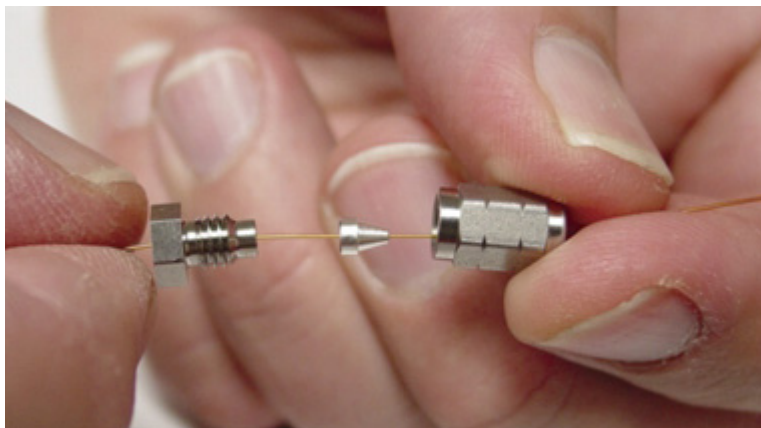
Assemble the internal nut, ferrule, and swaging nut
